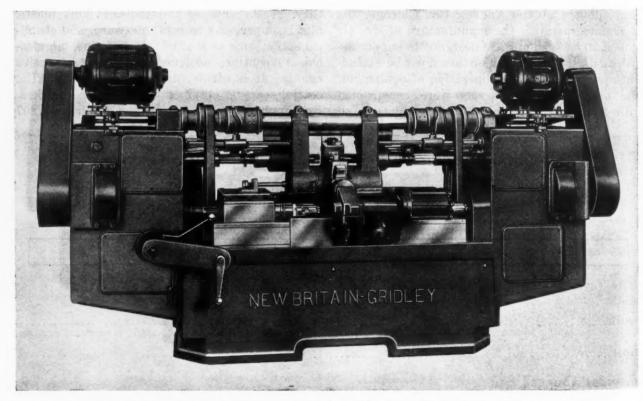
New Britain Double-end Six-spindle Tool-rotating Type Chucking Machine
